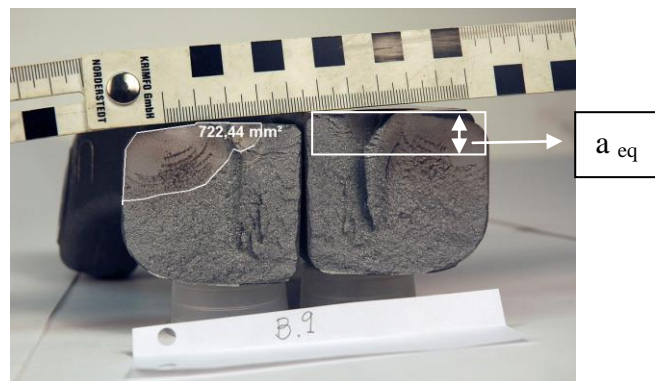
A sample fracture surface and measurement of mean crack propagation depth.
